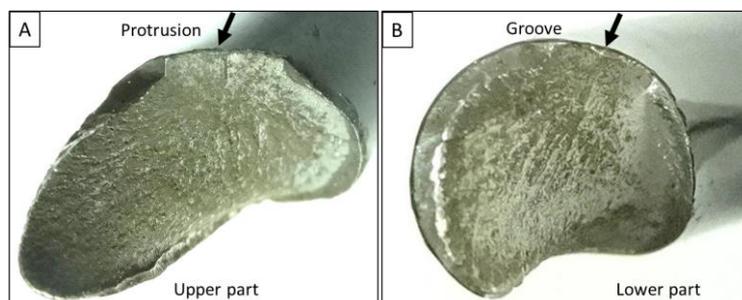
Fracture surfaces generated after the complete rupture of the coil spring.
